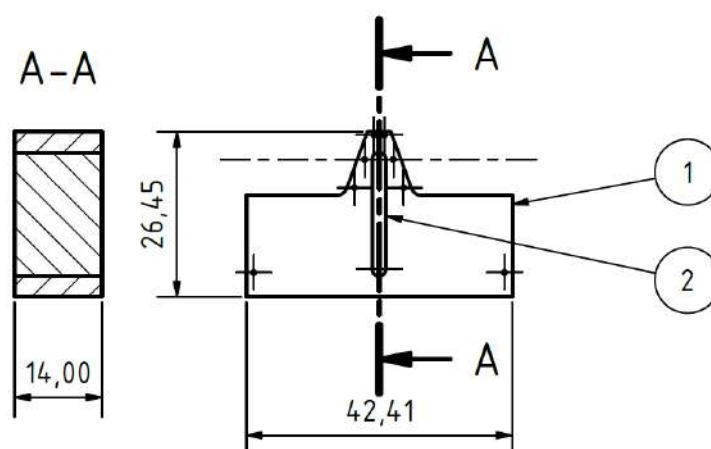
Assembly drawing of the hybrid tooth (1) and aluminum insert (2).
